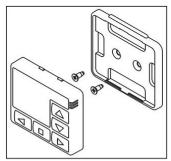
Installation of the control panel PU-27 using a mounting bracket
